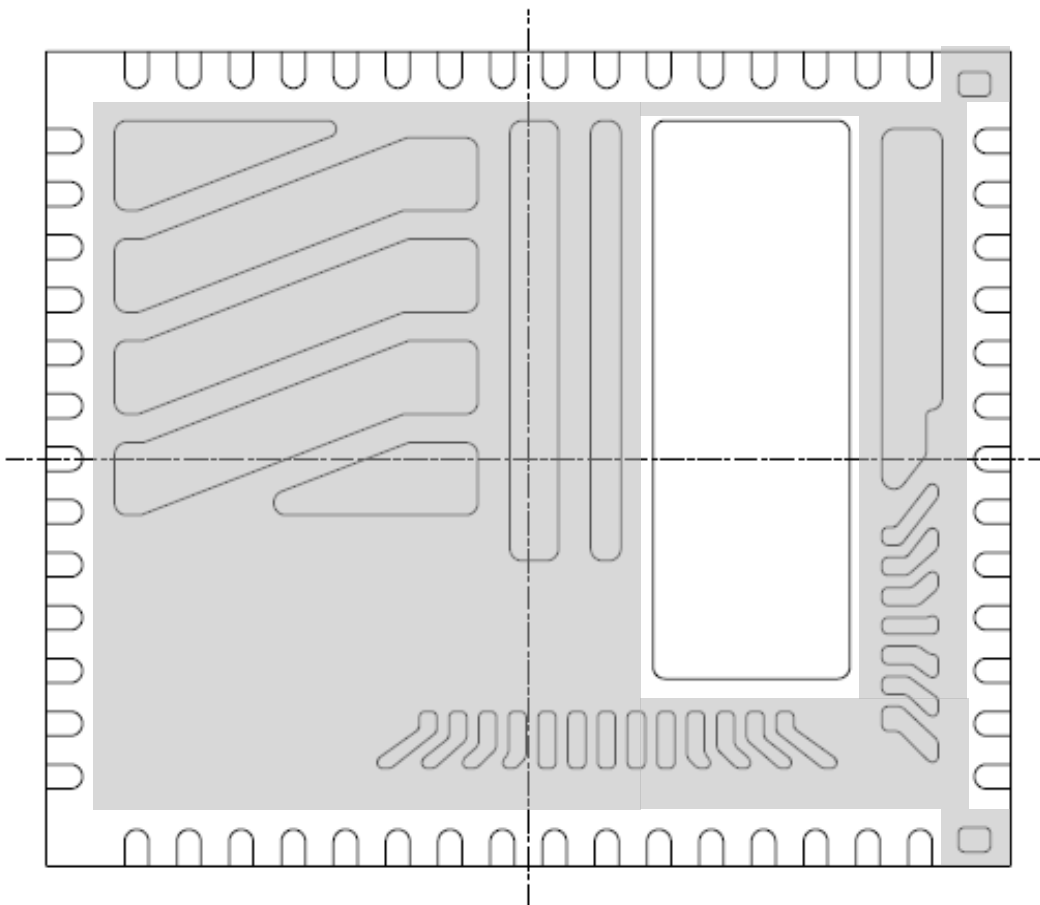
Lead-Frame exposed metal. Grey area highlights exposed metal that is not to be mechanically or electrically connected to the PCB.
